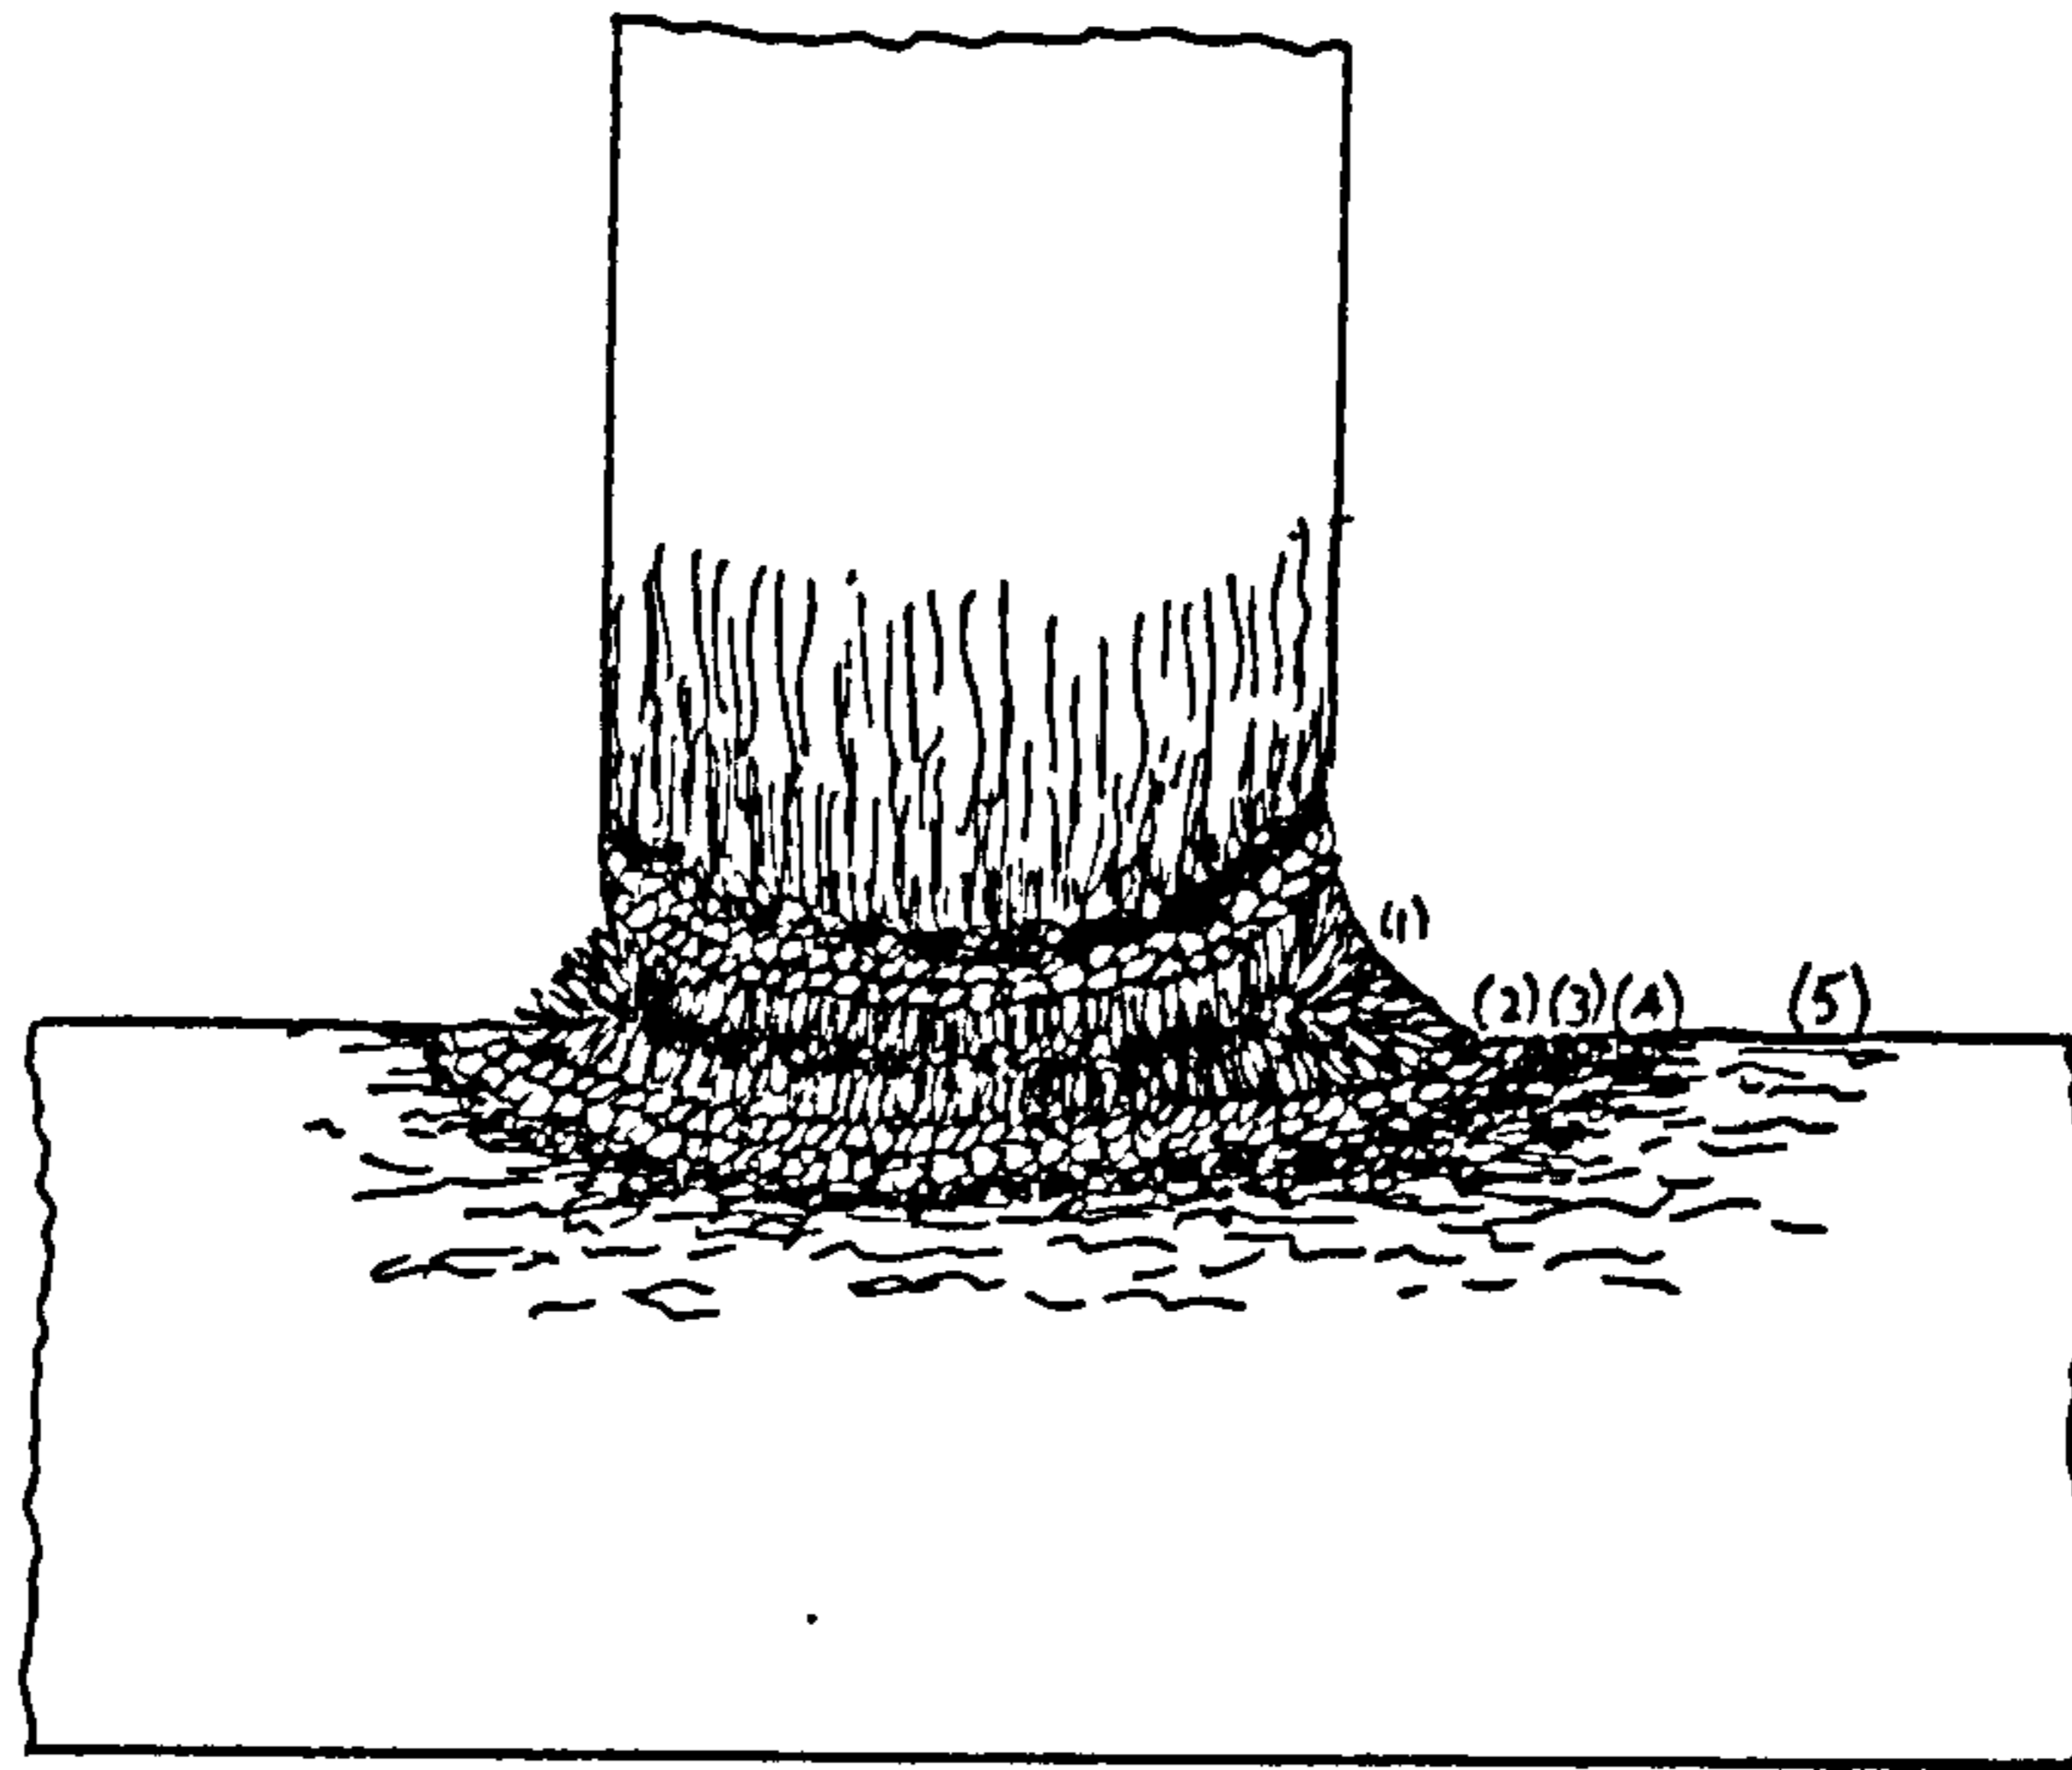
Hardness traverse test positions for fillet and laser skid welds
